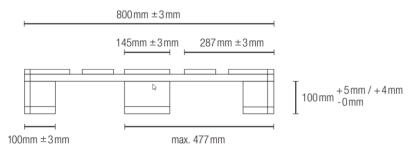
Dimensions and tolerances EUR pallet from 800 mm side
